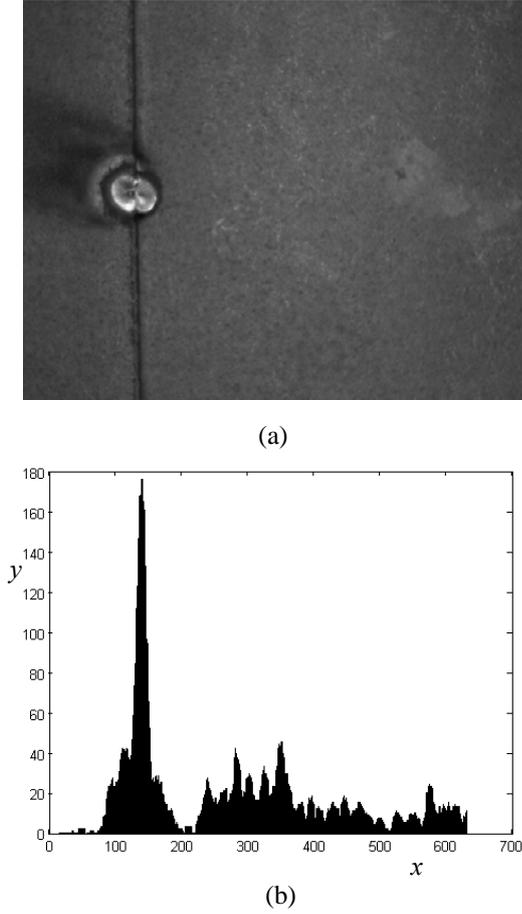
A welding seam and the projection results. (a) A welding seam with a welding beading. (b) Projection results.
